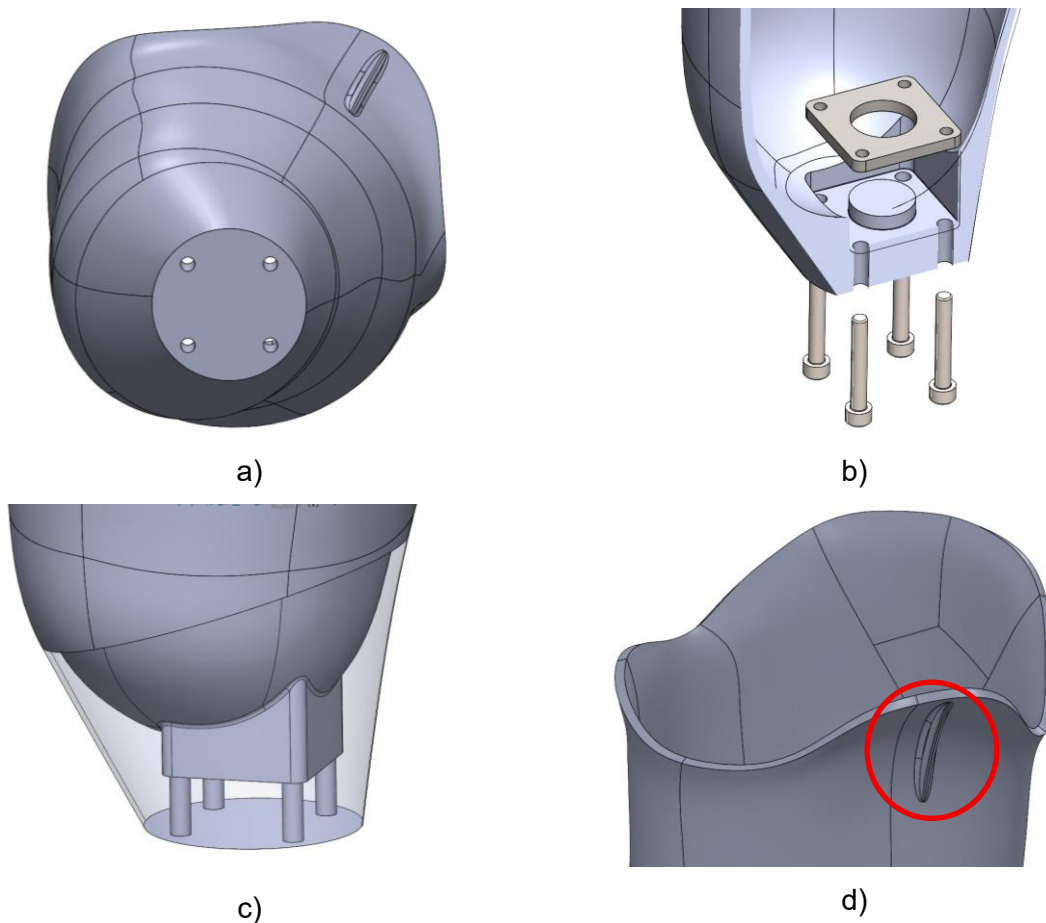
a) Circular adapter attachment region; b) Square plate insert with threaded M6 holes; c) Internal geometry of the distal end, Socket Design 2; d) Rib added to the region supporting the ischial tuberosity.
